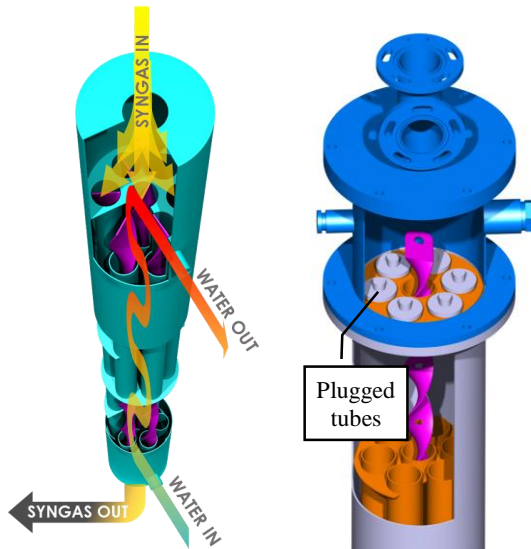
Full tubes-in-shell HX (a) and the reduced single-tube HX used for the tests (b).
